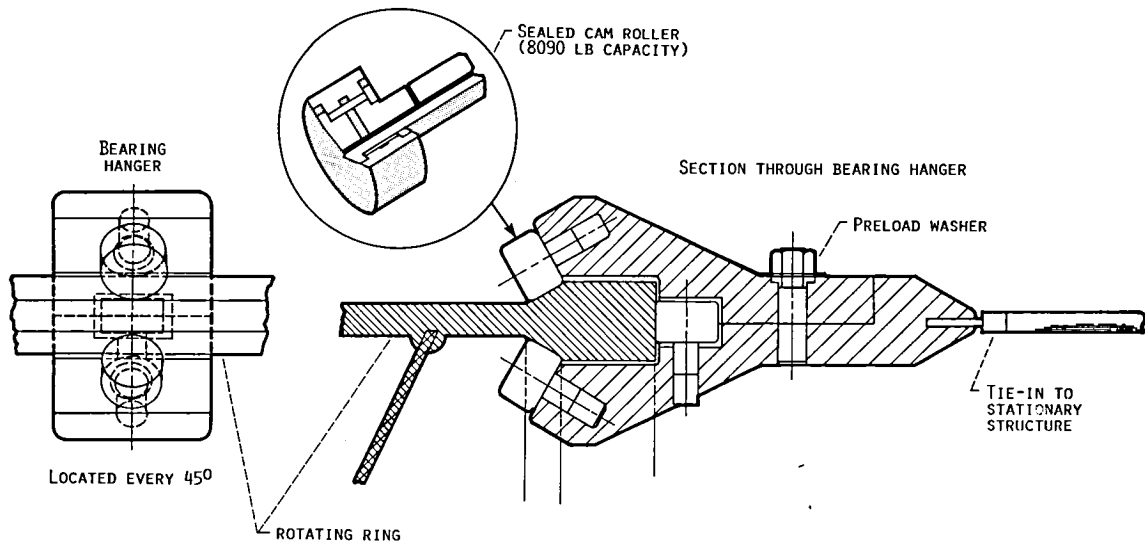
DETAILS OF CAM BEARING SUPPORT HANGER ASSEMBLY.
